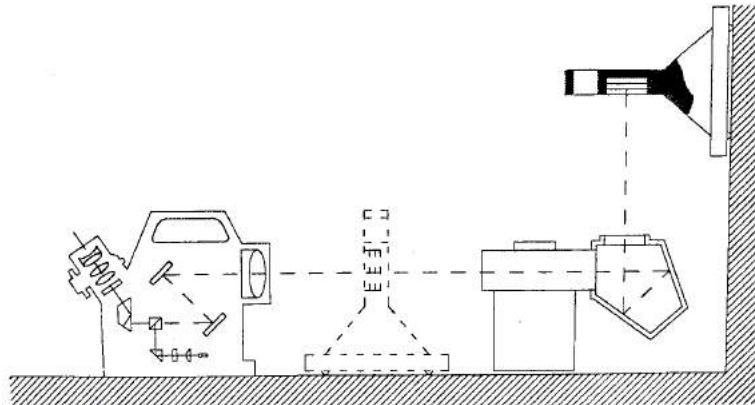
Checking the perpendicularity of two surfaces using a pentagonal reflector. [3]
